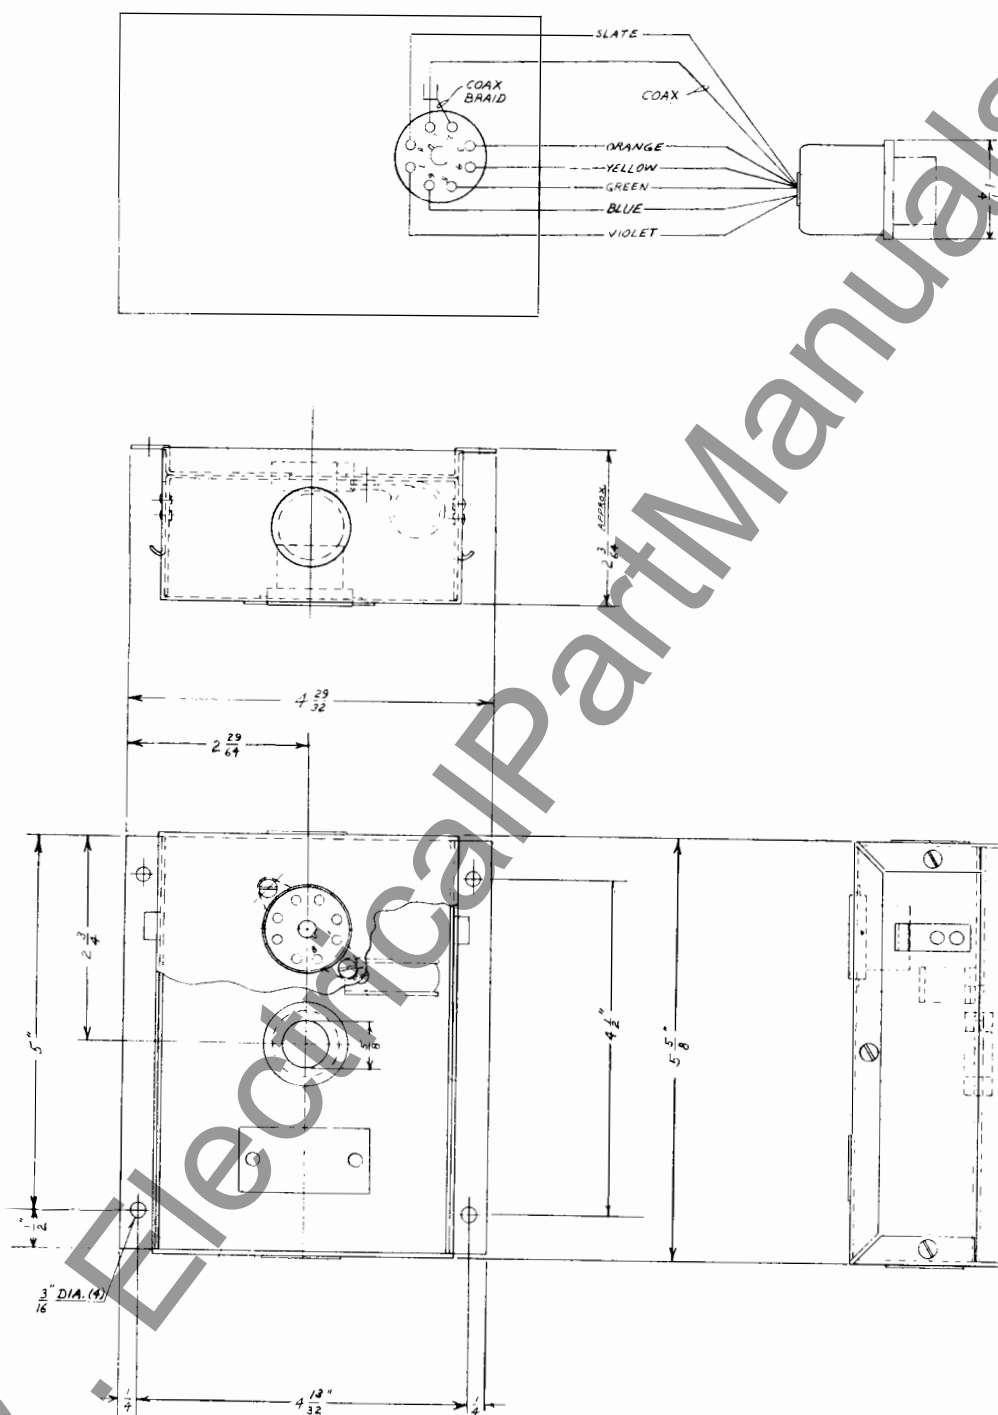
Voice Adapter Mounting Assembly with 6 ft. Cable, S#757D650G03.
